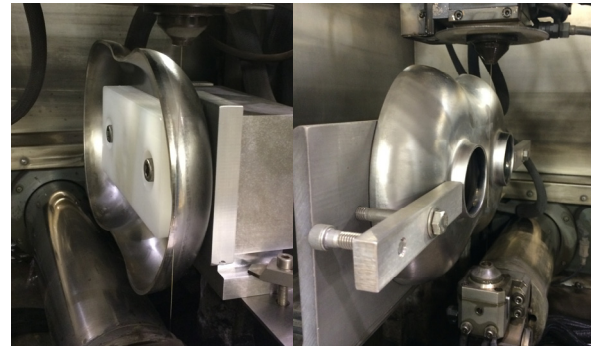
Wire EDM trimming of equator (left) and iris (right).
